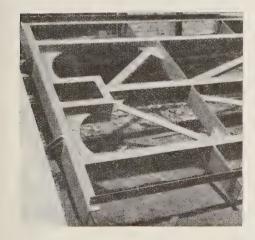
End of welded frame; the casing carrying the rubber buffing gear is shown clearly.
